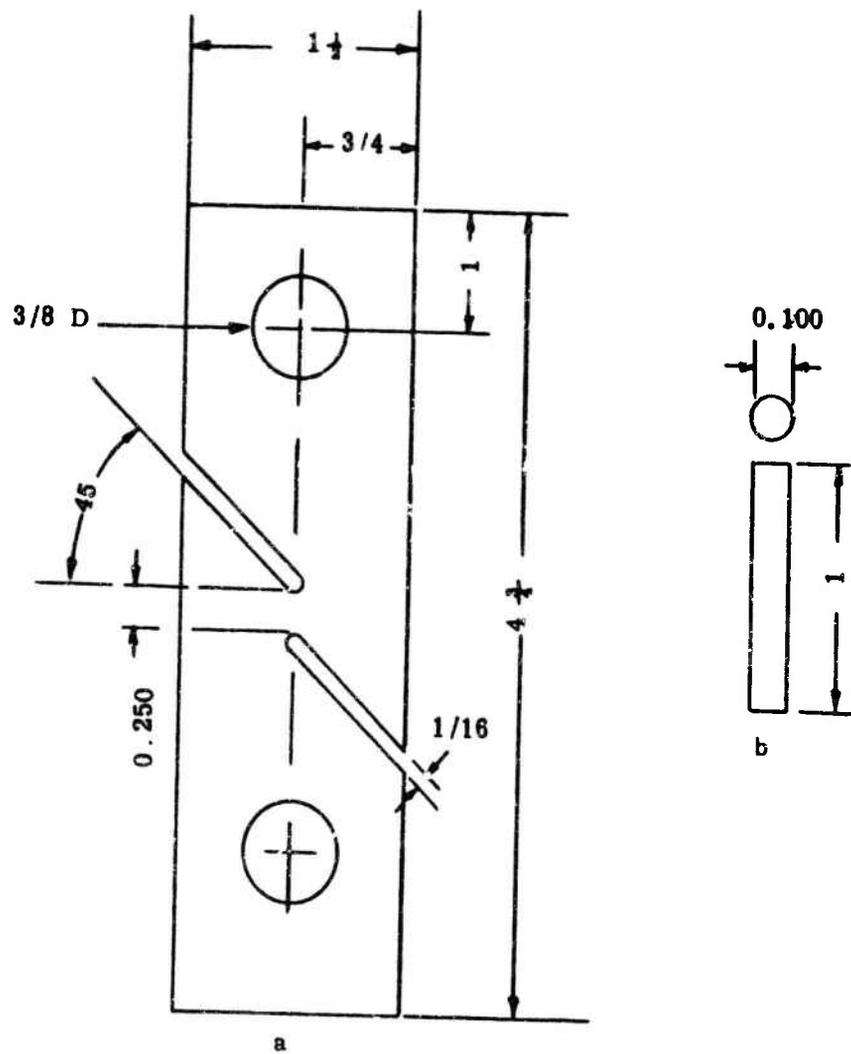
Shear Specimen for Sheet (a) and Bar (b) Materials
